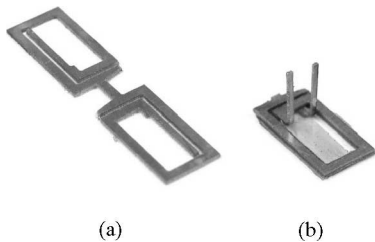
Inductance cancellation winding photographs of single-layer pattern and final two-layer construction for the 1.0  $\mu\text{F}$  integrated filter element. (a) Cut pattern. (b) Final assembly.
